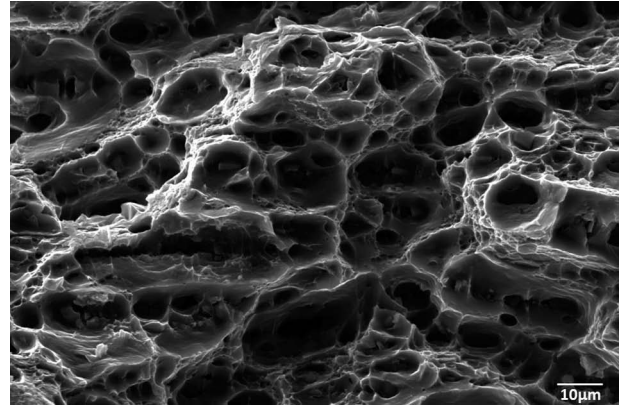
Higher magnified image of the fracture surface shown in Fig. 96
